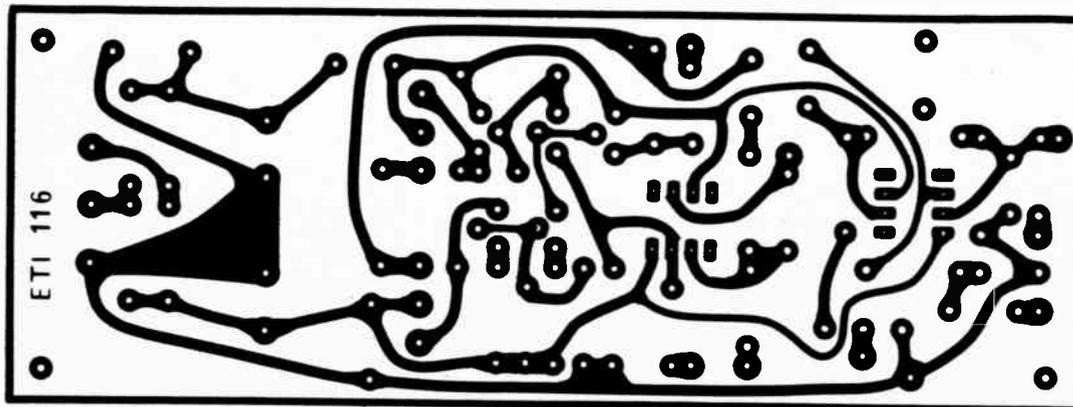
Printed circuit board layout. Full size. 140 x 62 mm.
